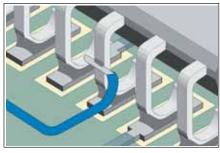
Not Recommended Wire soldered perpendicular to lead.
